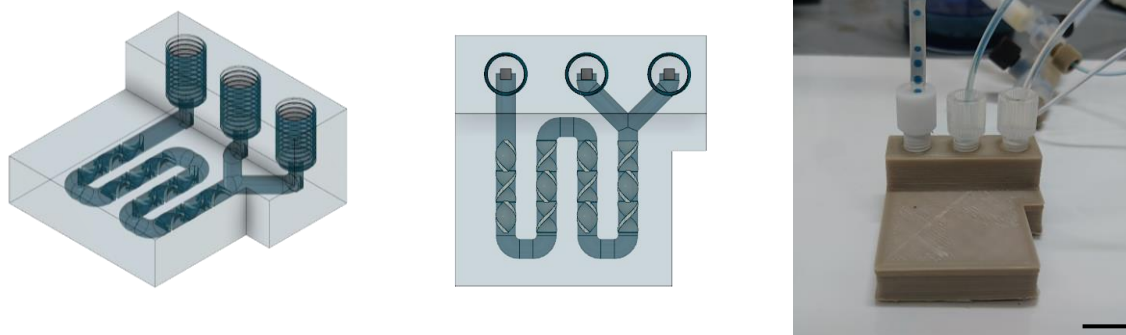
CAD image of the designed part and final printed piece. (Left) Orthographic view (Centre) Top view showing channel and mixer geometry (Right) Printed part. Scale bar is 10 mm.
